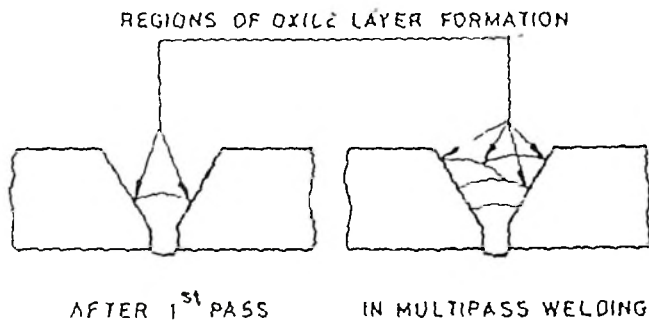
Regions of oxide layer and porosity formation in multipass welding.
